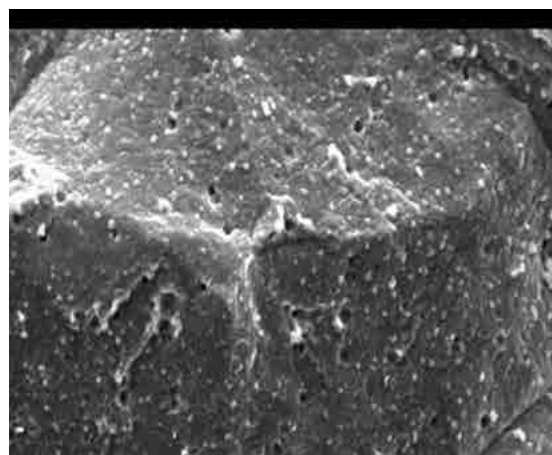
Crack surface due to Hydrogen in P22V SA welds
